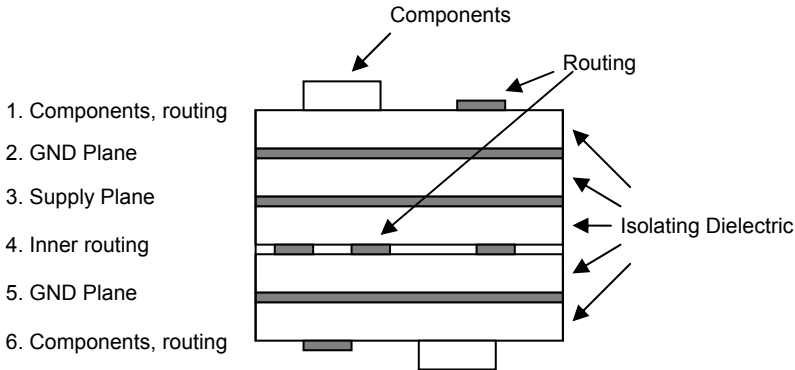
Cross section of a PCB showing the power planes and inner routing layer
